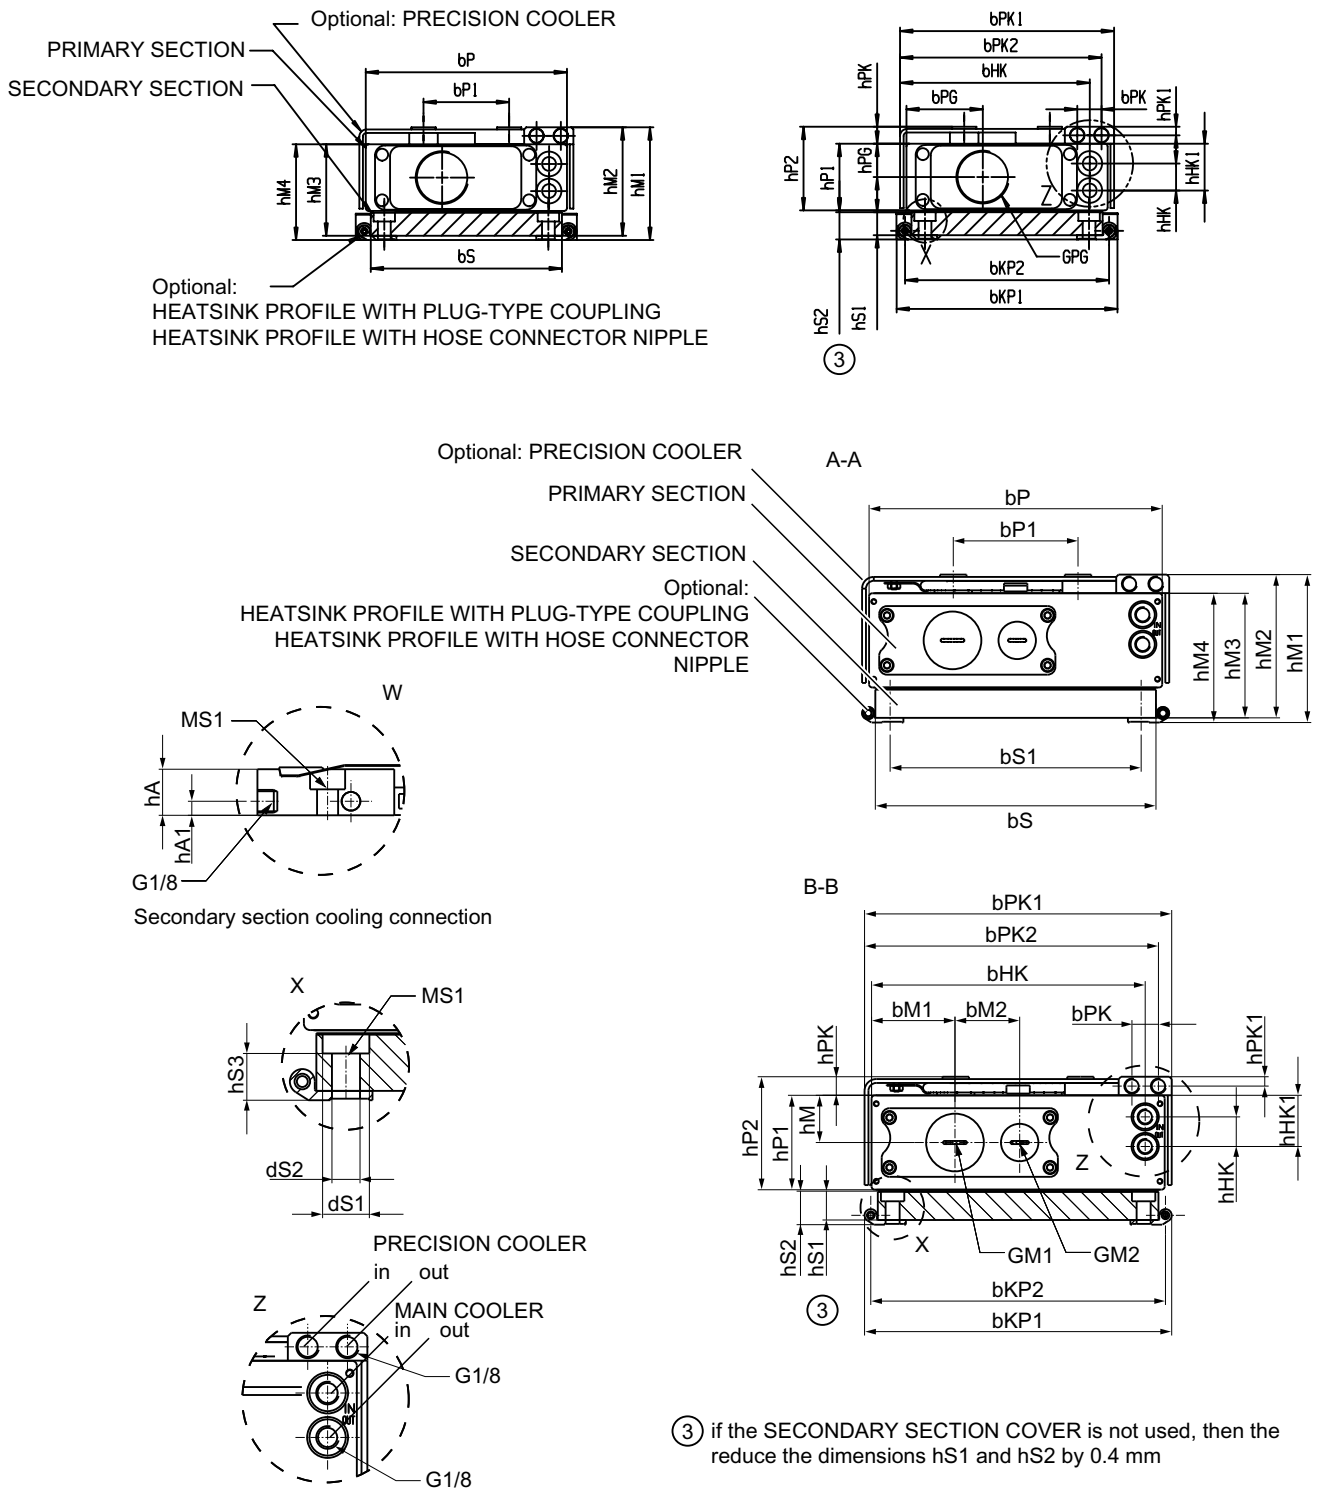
Installation dimensions for motors 1FN3300 - 1FN3450 (cross sections and details)
